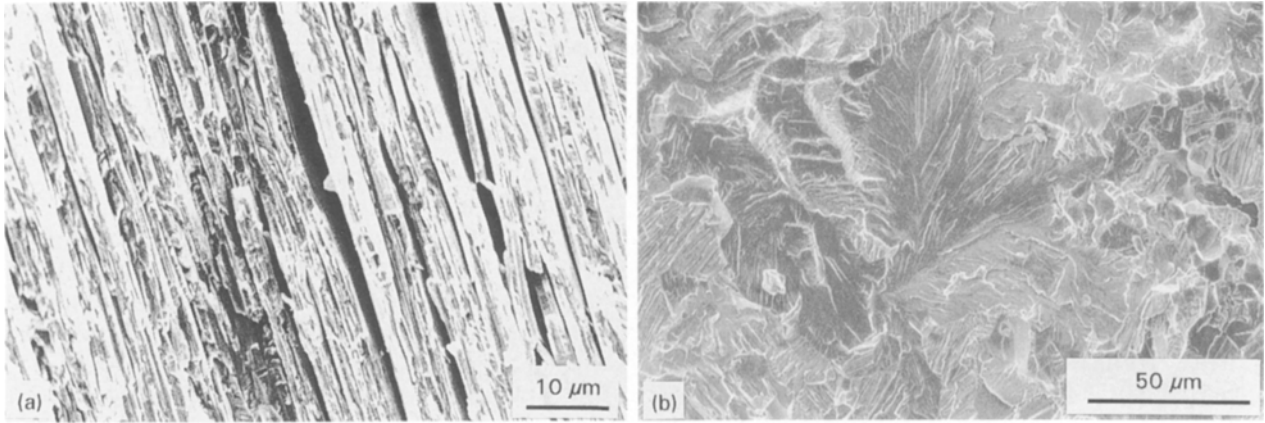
Fractographs of fracture toughness specimens. (a) HT-TiAlCr; (b) ITF-TiAlCr.
